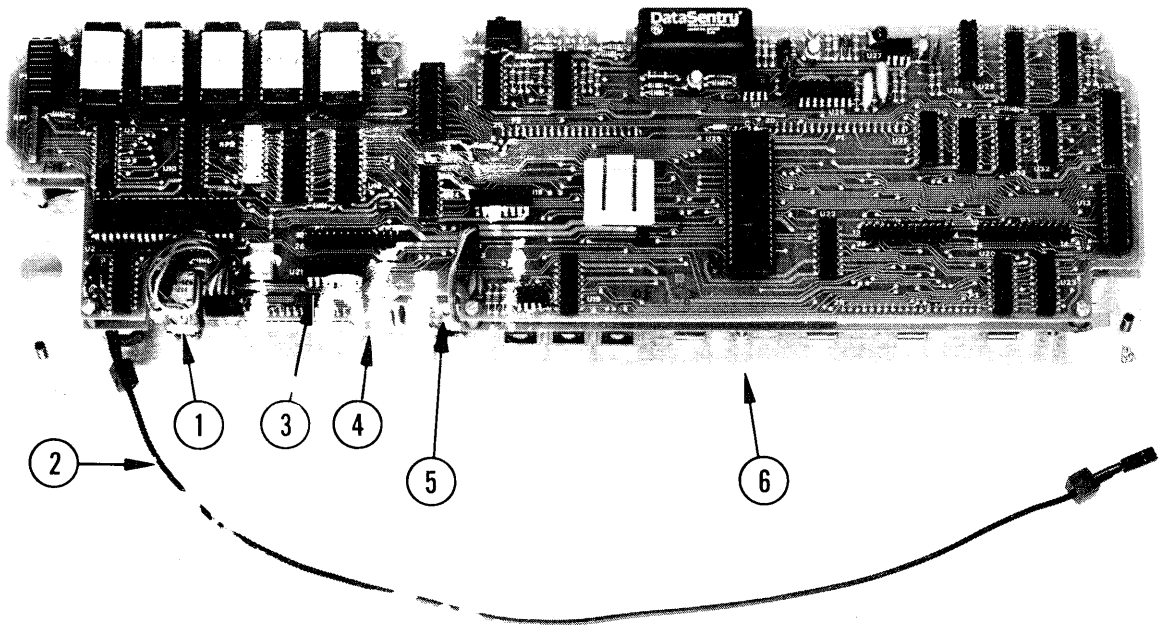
A15 Front Panel Assembly (Sheet 2 of 2)
